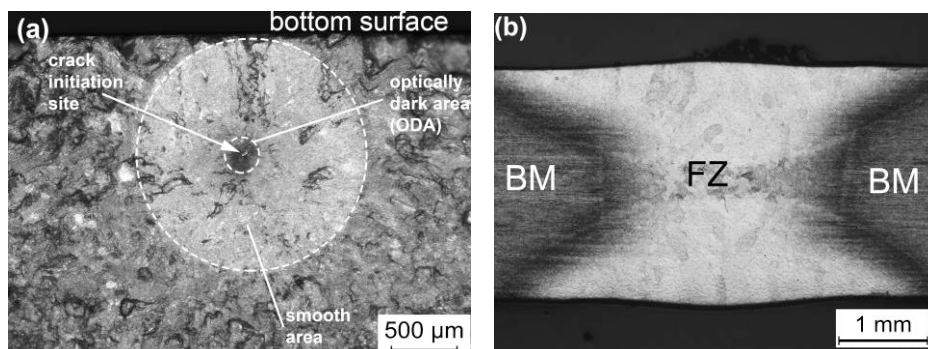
(a) Fish-eye fracture surface of the machined joint (530 MPa; 3,569,700 cycles); (b) effect of the LSR treatment on the shape of the weld.
